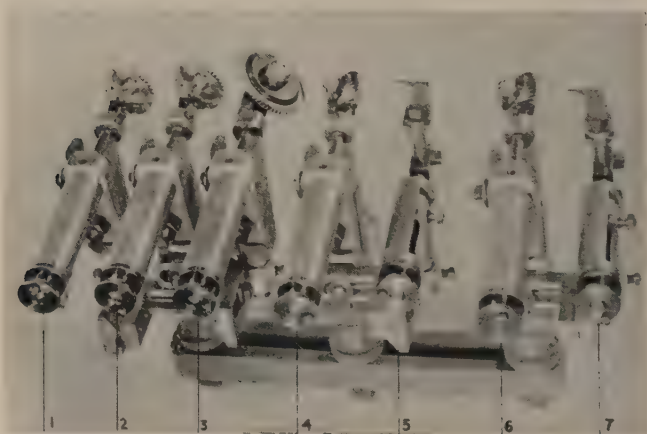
Arrangement for double plush with double backing: (1) plush feeder; (2) plush feeder; (3) clearing bur; (4) sinker bur; (5) presser; (6) sinker bur; (7) presser.
